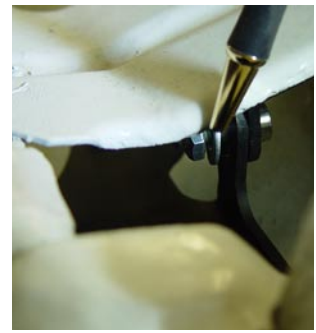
(nasty little cuss) Motor Mount bolt located under the intercostal.
